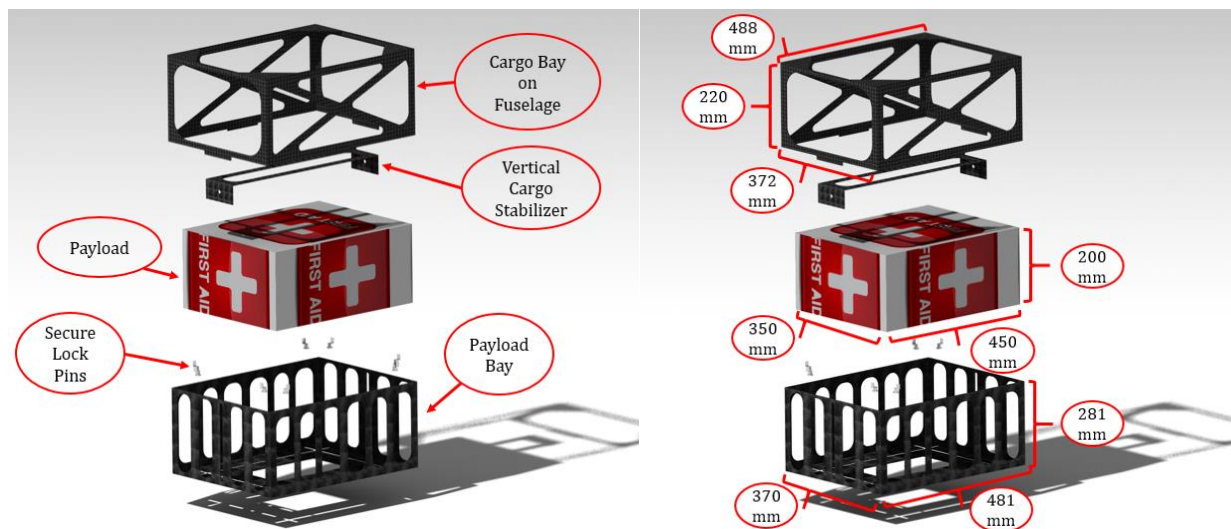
Cargo Compartment Parts Description & Major Dimensions
